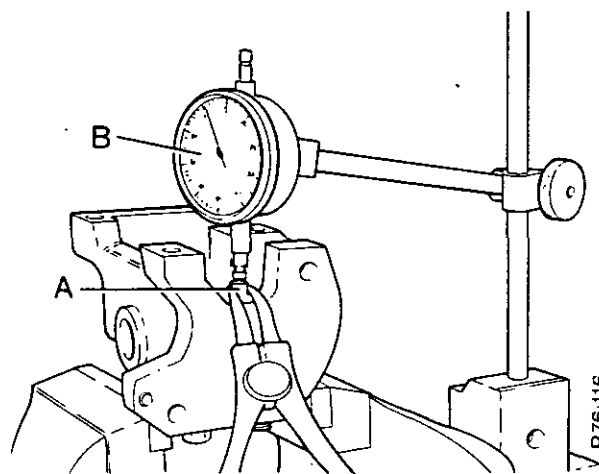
ADJUSTMENT OF THE TCU VALVE
